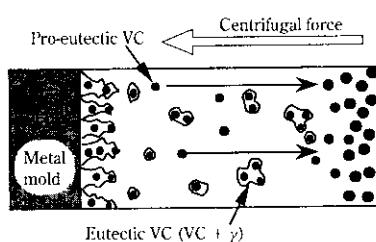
Segregation mechanism of V carbide in inner surface side of a high C - high V steel roll during centrifugal casting
